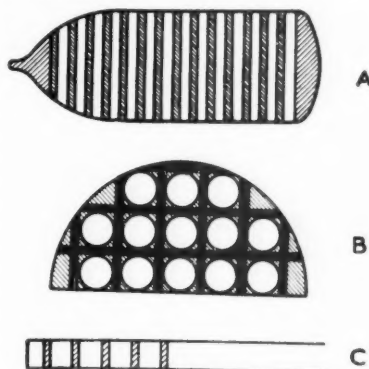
Diagram showing how jewel blanks are cut from half boules and rod. (a) Normal boule; (b) cutting jewel blanks from boule 3 mm. squares; (c) cutting jewel blanks from rod. (Shaded areas represent waste)
